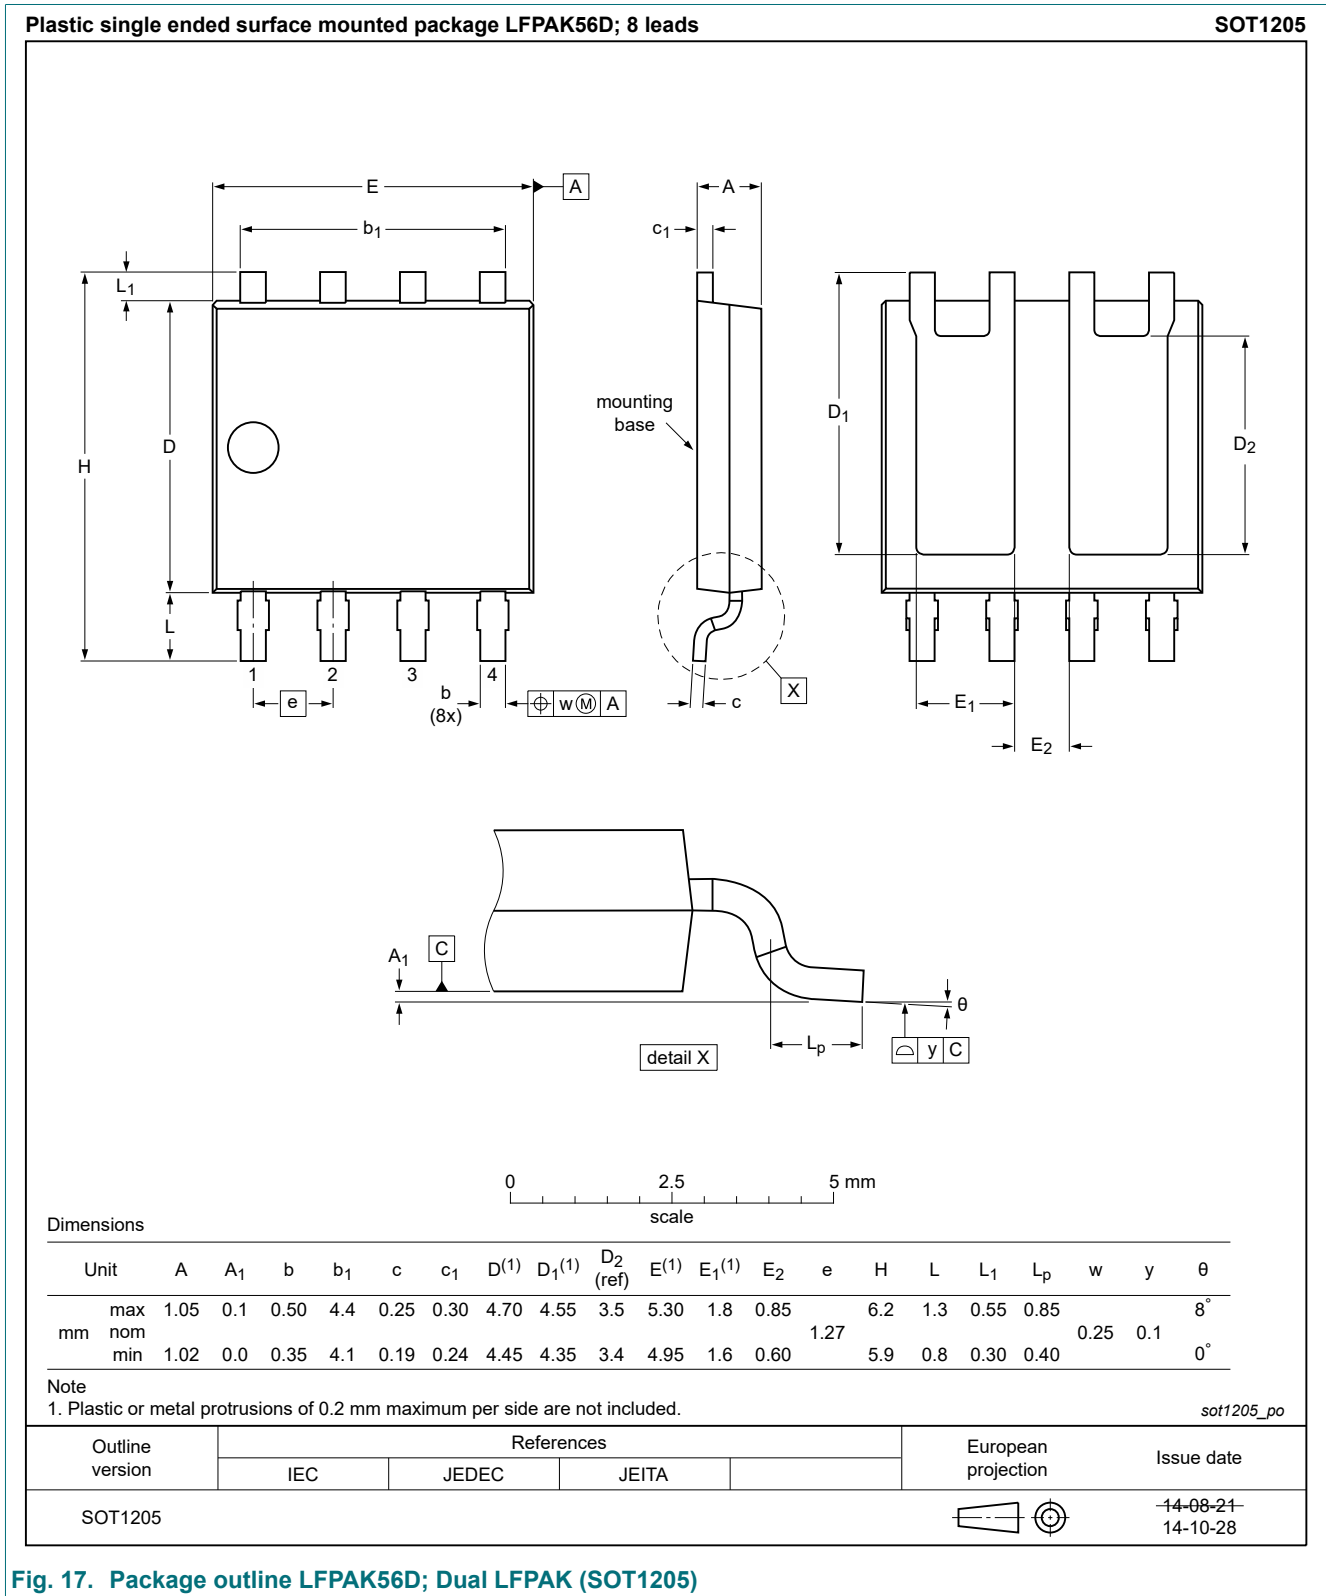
Package outline LPAK56D; Dual LPAK (SOT1205)
